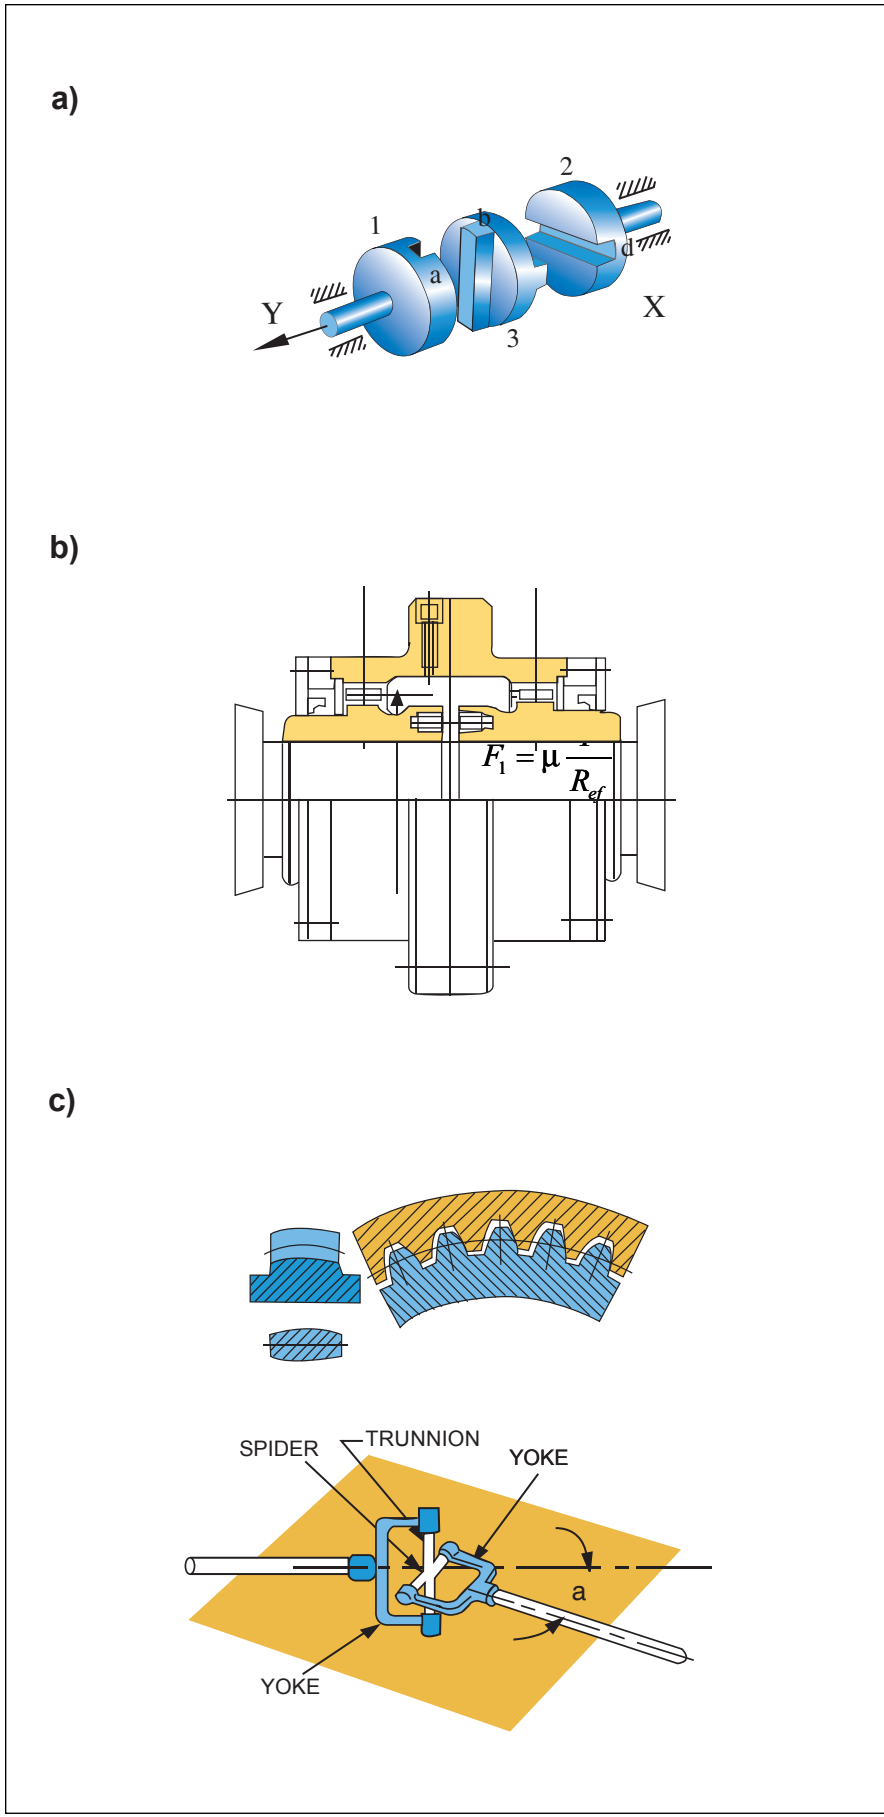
Torsionally rigid, misalignment-compensating couplings: Oldham couplings (a), gear couplings (b) and universal joints or Cardan joints (c).
